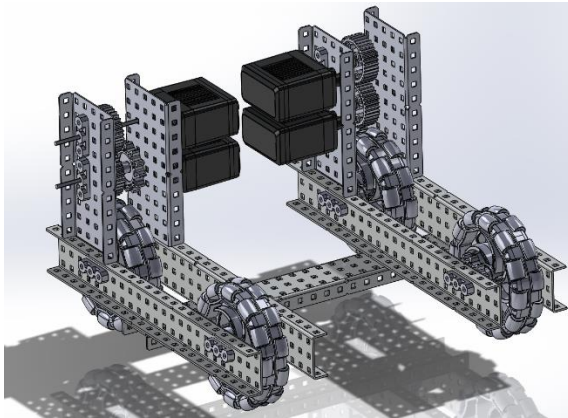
CAD Drivetrain Prototype Front Three-Quarters
